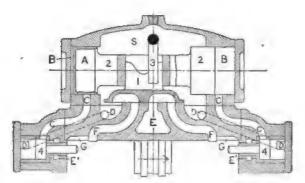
Valve-gear of the Cameron Simplex Pump.
